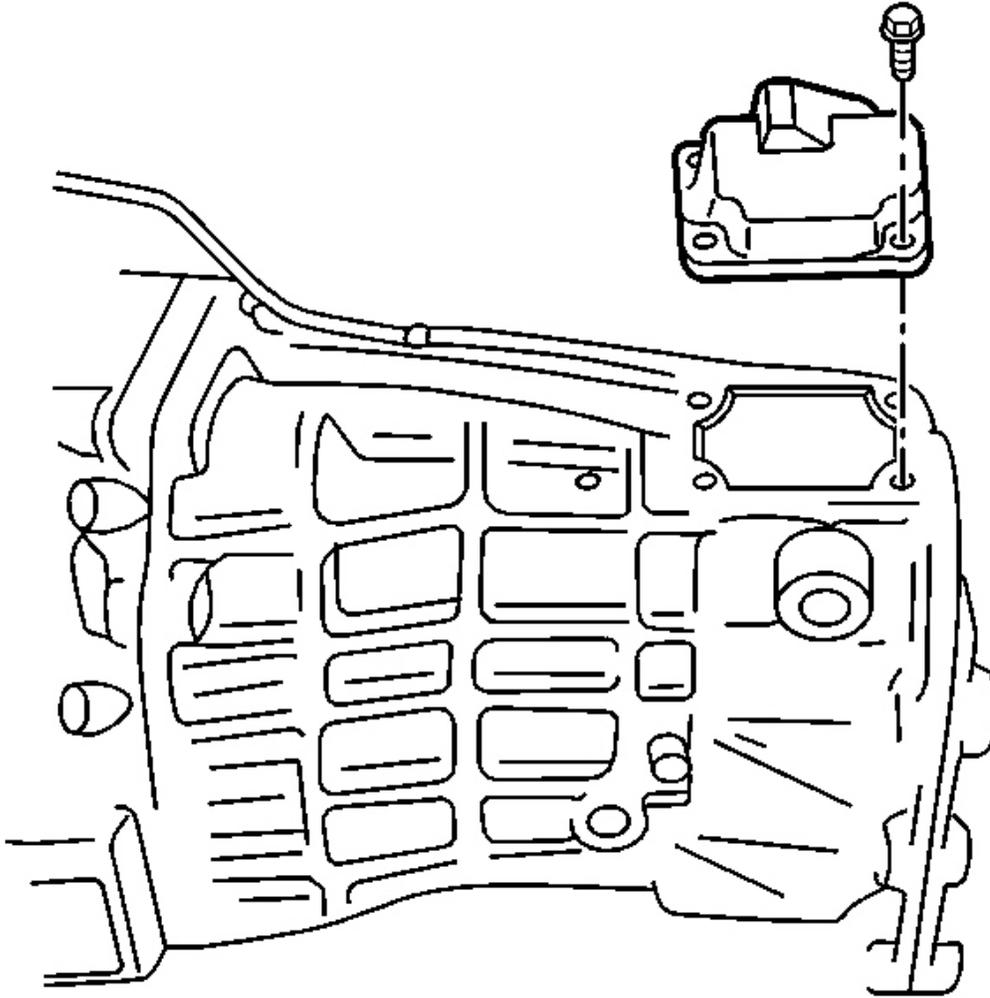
View Of Transmission Case Cover & Case Cover Bolts
